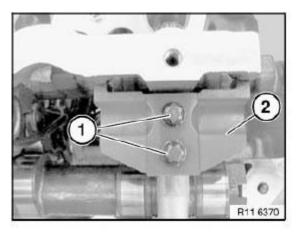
Identifying Screws And Guide Block Courtesy of BMW OF NORTH AMERICA, INC.
